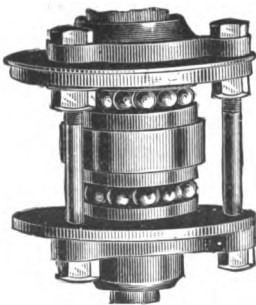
A.—FRICTION BALL BEARING OF HYDRAULIC-FEED MACHINE.
